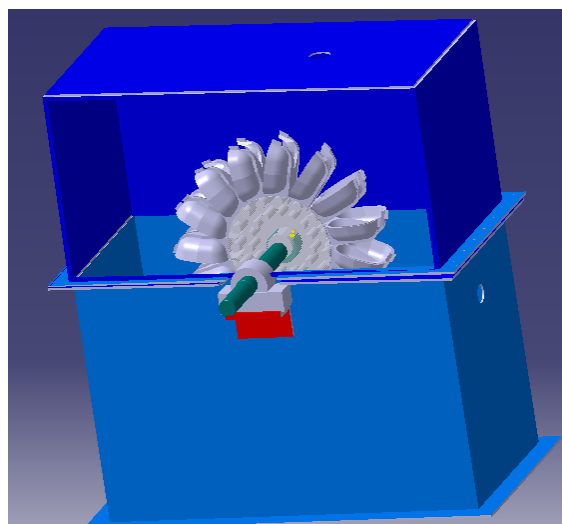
3D View of double jet Pelton turbine housing assembly.
